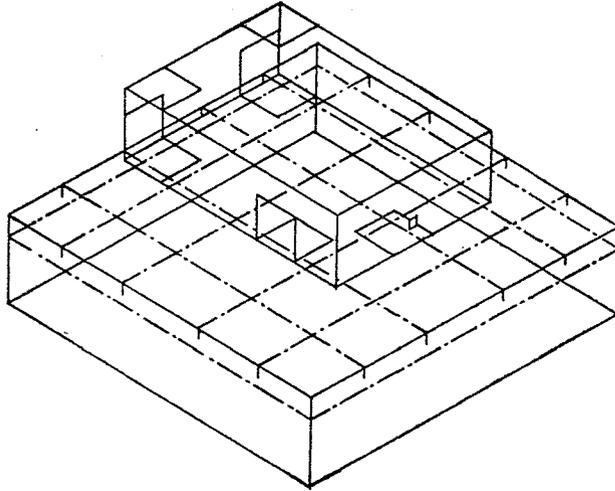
Envelope surface of a workpiece with zones, and pallet (base plate) in the Jig & Fix CAD system
